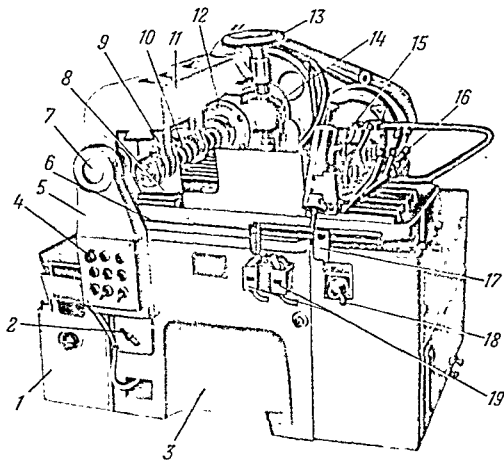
Semiautomatic tap-flute milling machine, model 16B-1M
